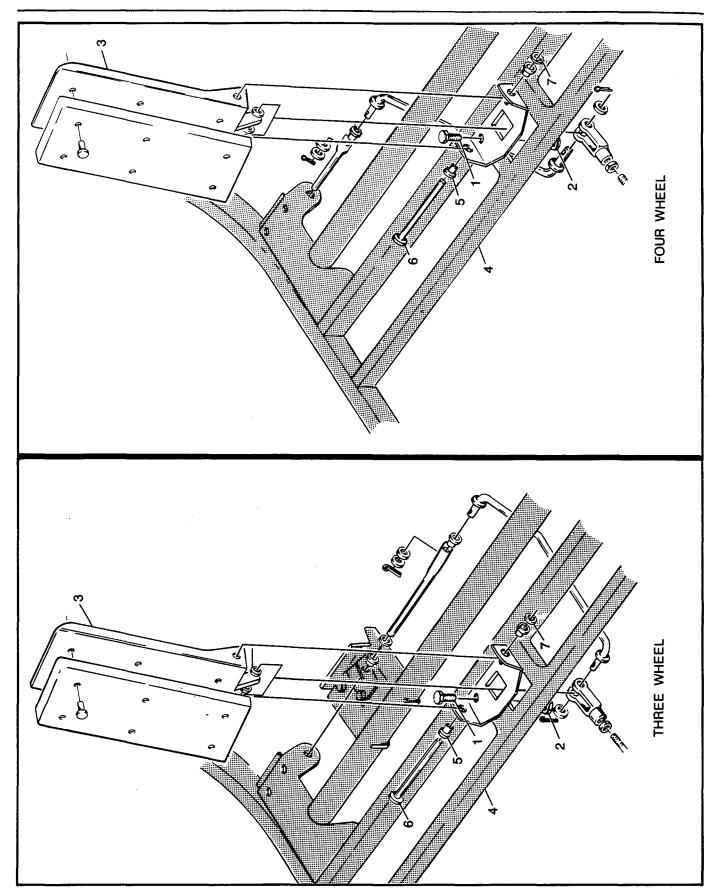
ACCELERATOR PEDAL REMOVAL
